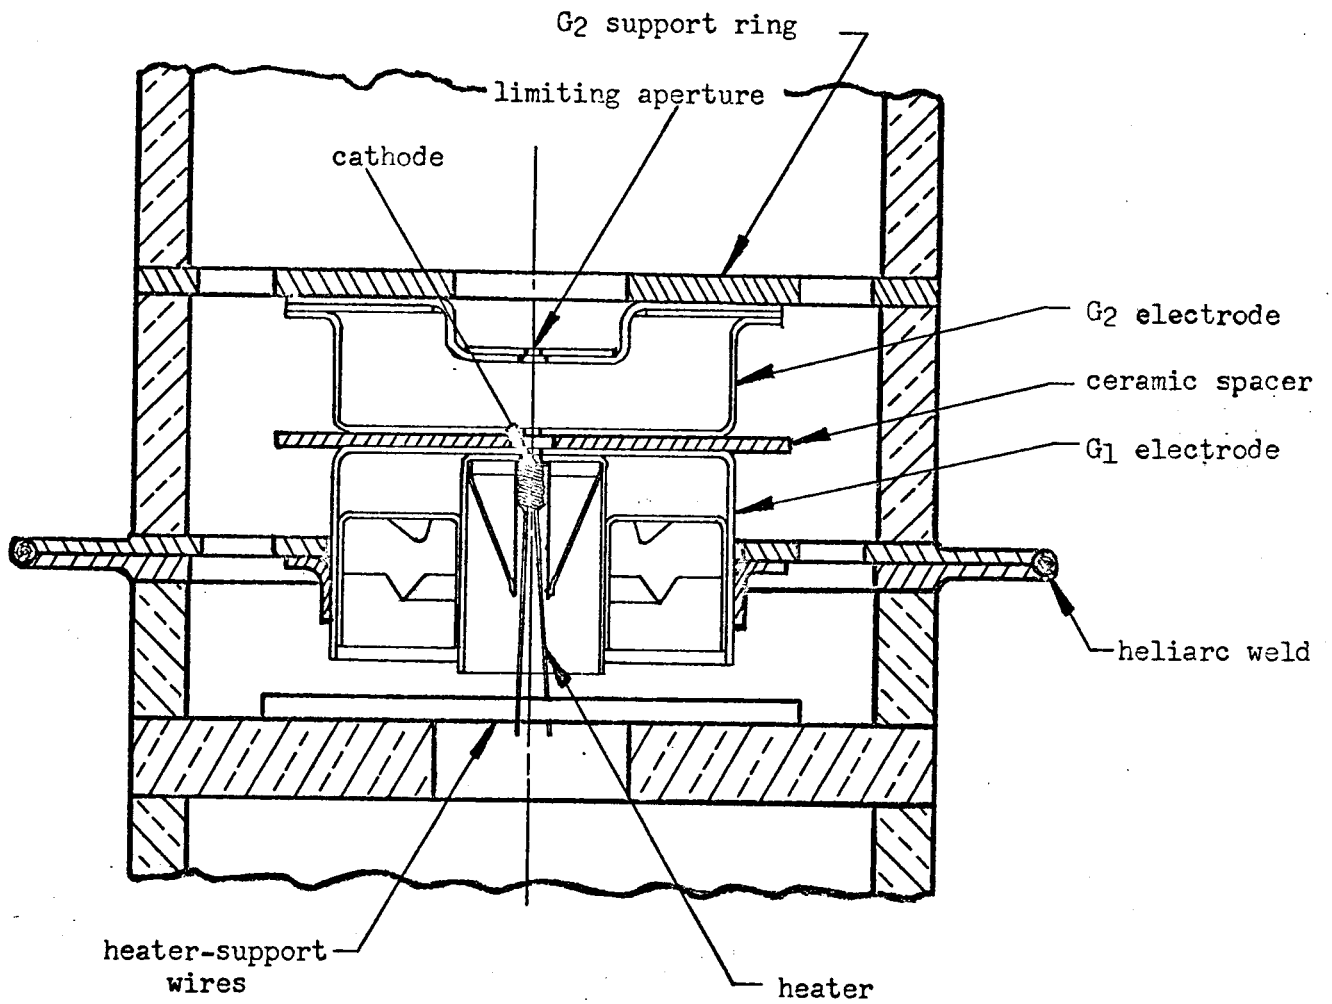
Cross Sectional View of Gun Section of Ceramic Vidicon
